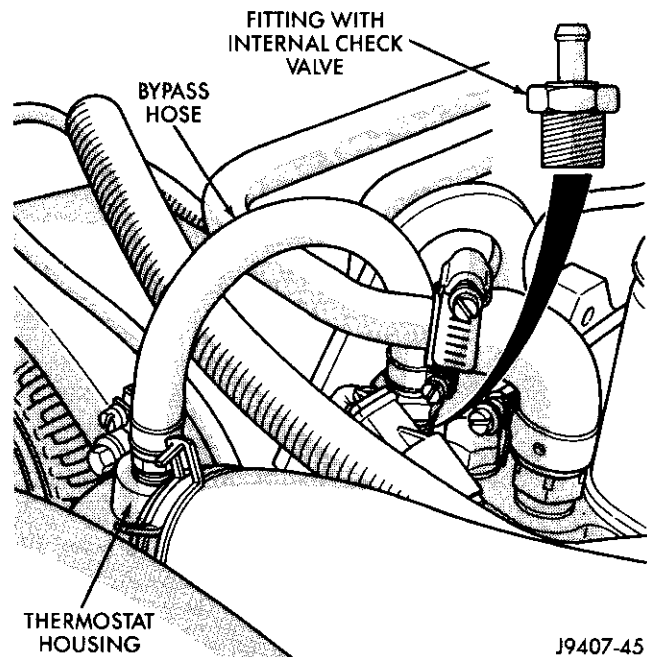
One-Way Check Valve (Jiggle Pin) Location
